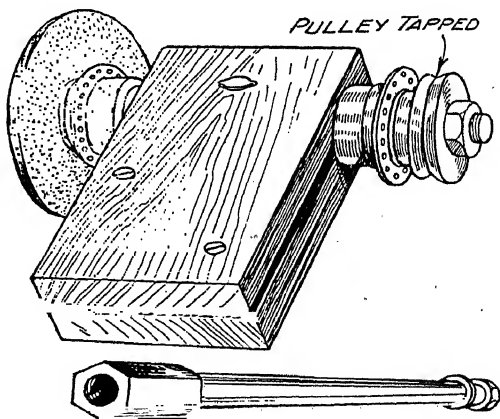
General arrangement of an improvised belt-driven grinding head.
